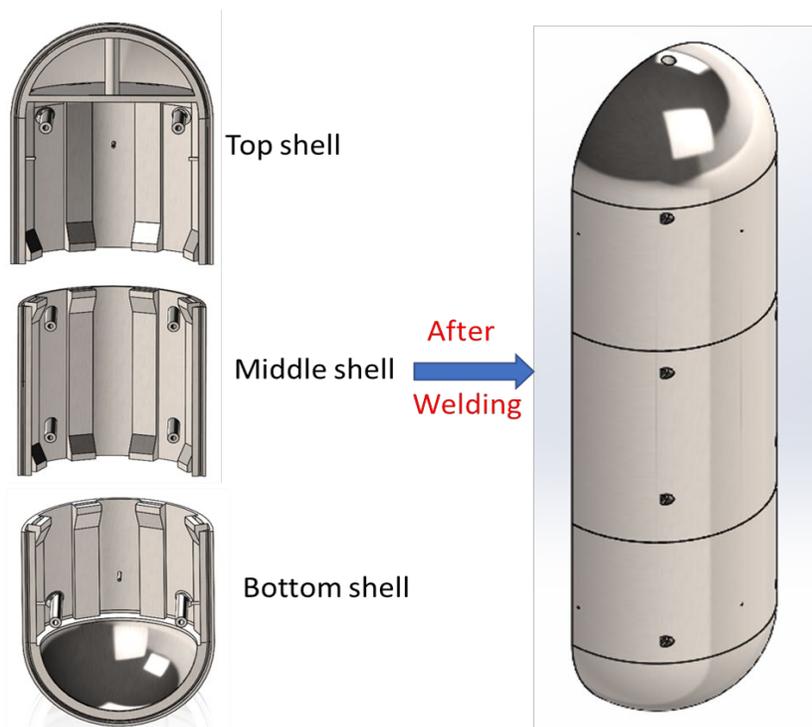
Shell components for fabrication of ice melting probe before and after welding.
